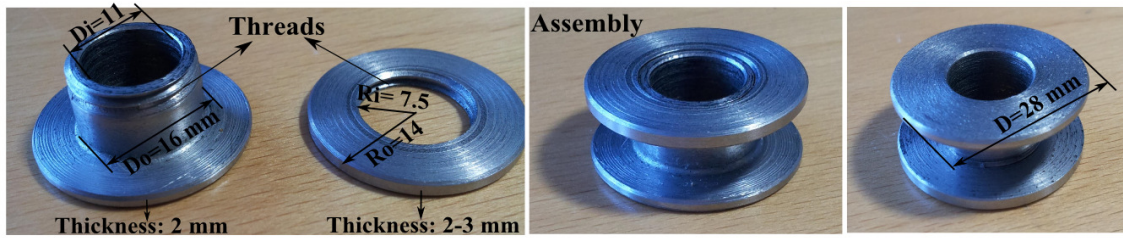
Configuration of the steel inserts and their dimensions in mm
